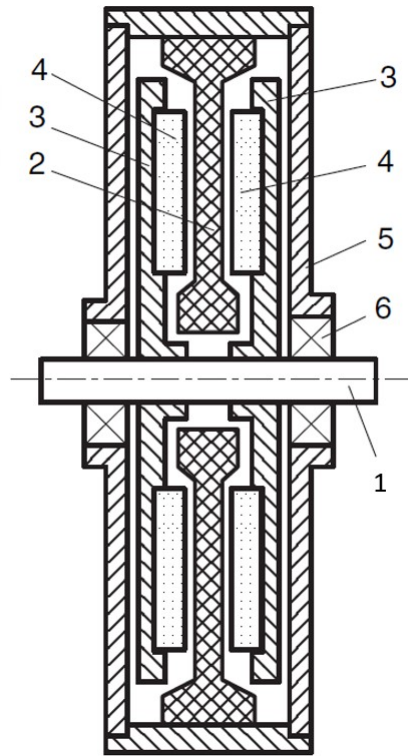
Double-sided coreless motor with internal stator. 1 — shaft, 2 — stator winding, 3 — rotor, 4 — PM, 5 — frame, 6 — bearing. Source: [61]
